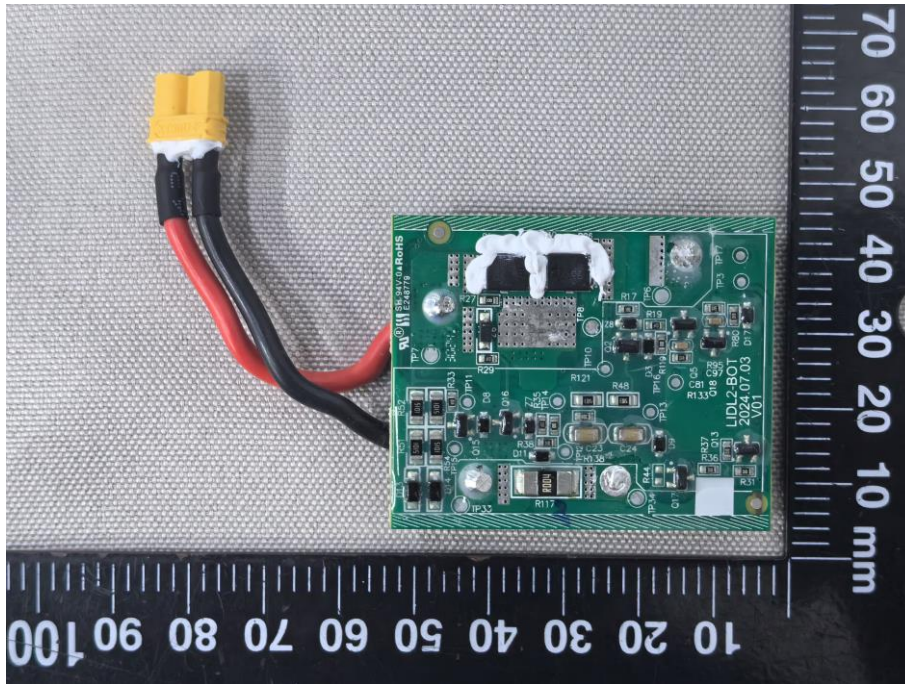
Bottom view of PCBA2(E36100B-ST1)
